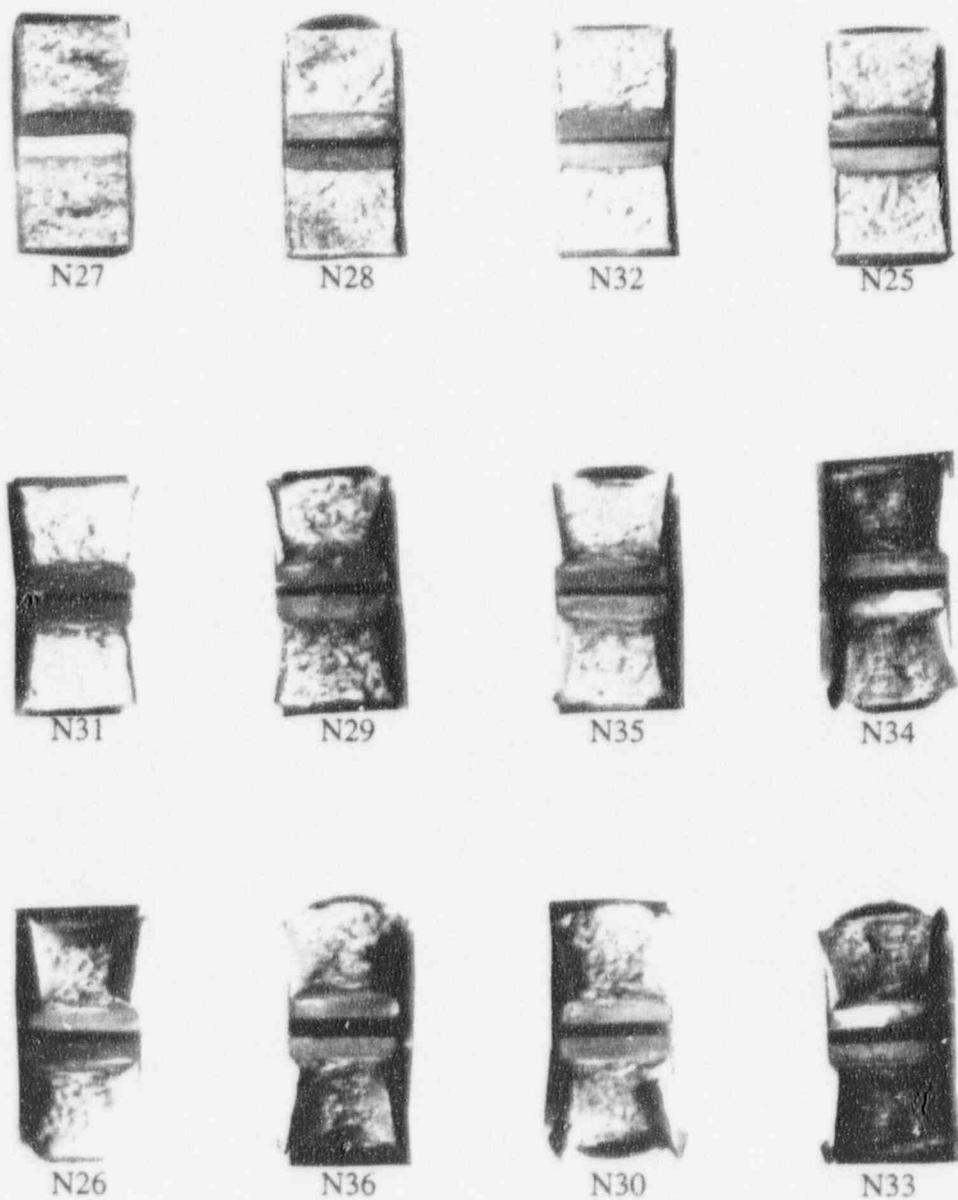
Charpy Impact Specimen Fracture Surfaces of the Prairie Island Unit 1 Reactor Vessel Intermediate Shell Forging C (Tangential Orientation)
